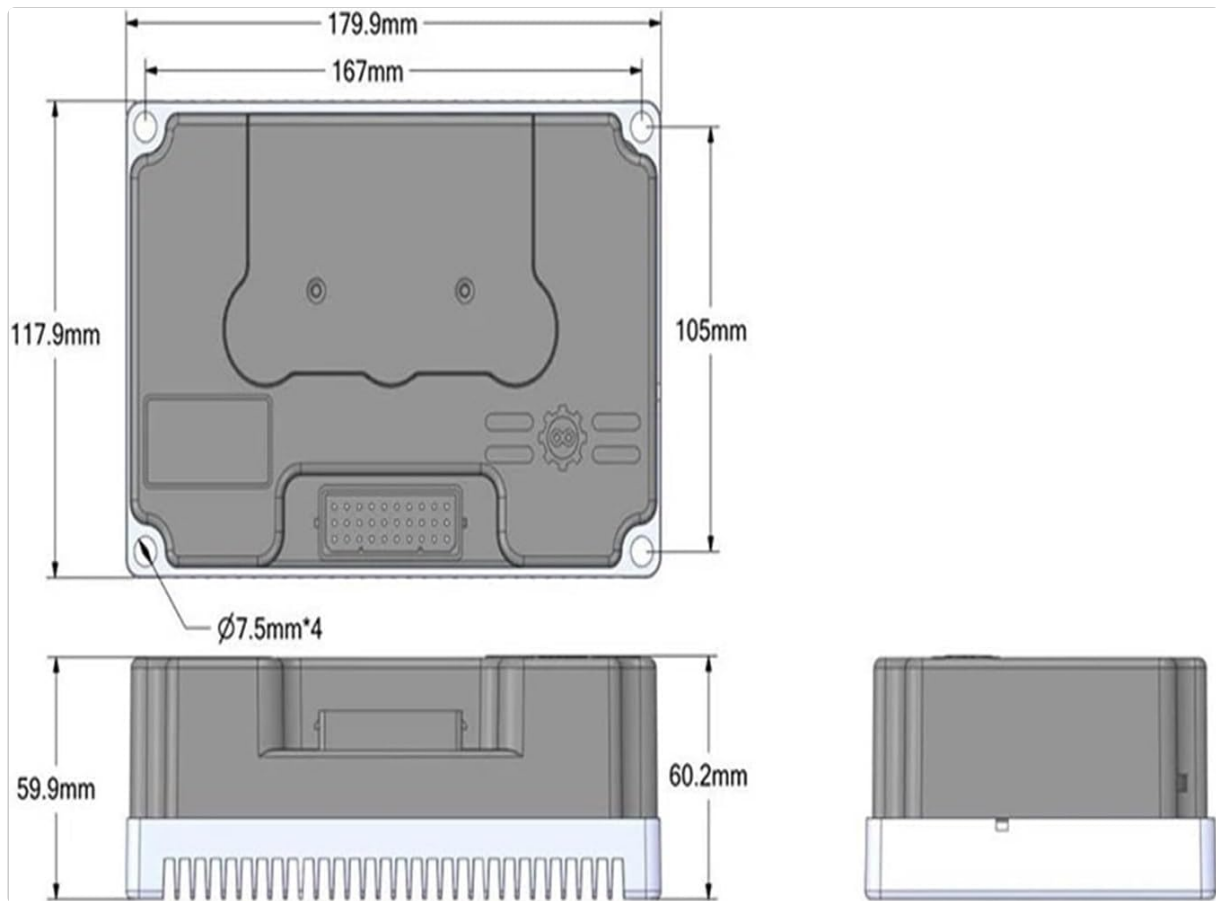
Detailed dimensional drawing of the SHHJCO Far-Driver V2 Controller ND72340.
